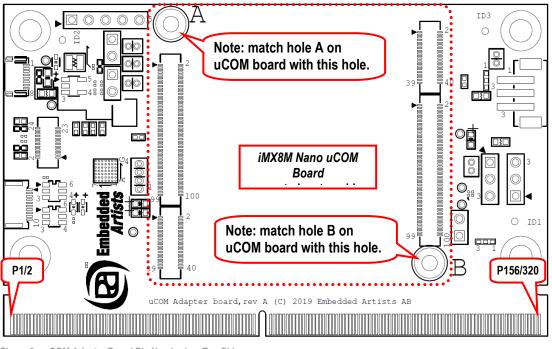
uCOM Adapter Board Pin Numbering, Top Side
